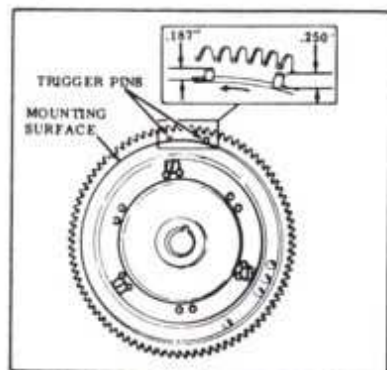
Remove flywheel and drive trigger pins in or out as necessary until long pin is extended 0.250 inch (6.35 mm) and short pin is extended 0.187 inch (4.75 mm) above mounting surface.
